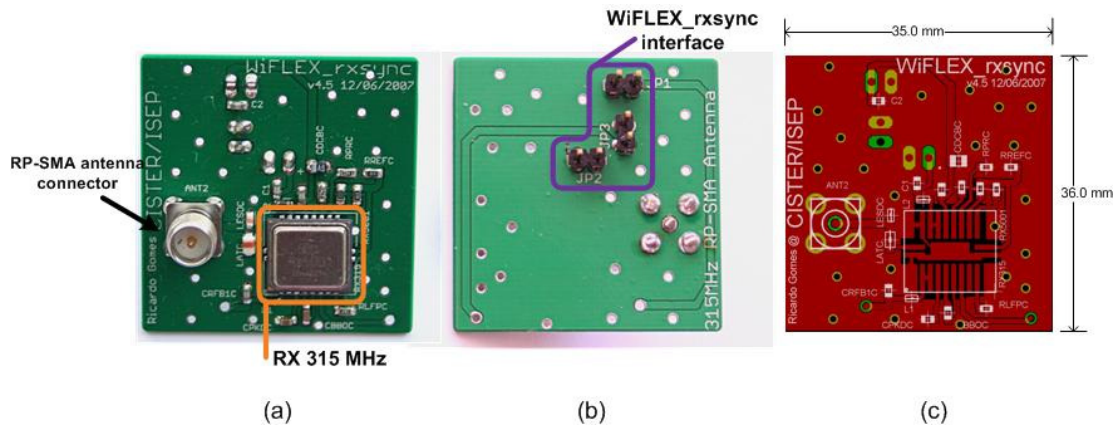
Components distribution over top (a) and bottom (b) layers of the WiFLEX\_rxsync board; (c) PCB dimensions
